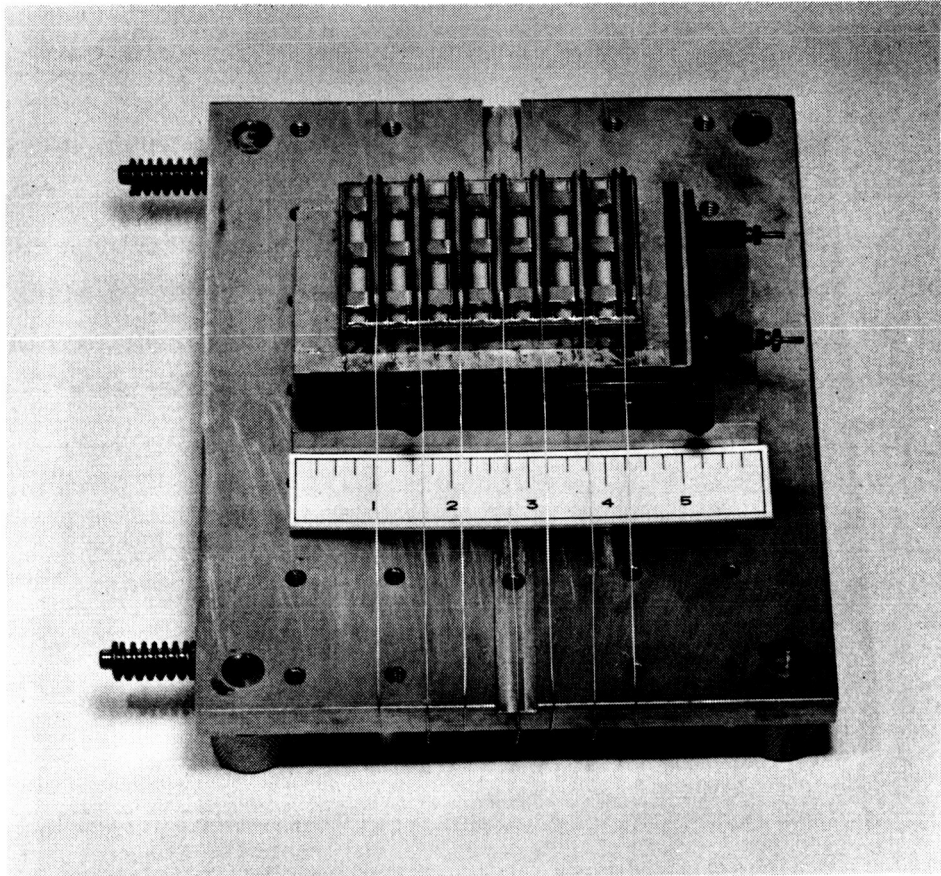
Fixtures for welding 14-strip emitter to manifold thermal conductance legs (intermittent weld path).
